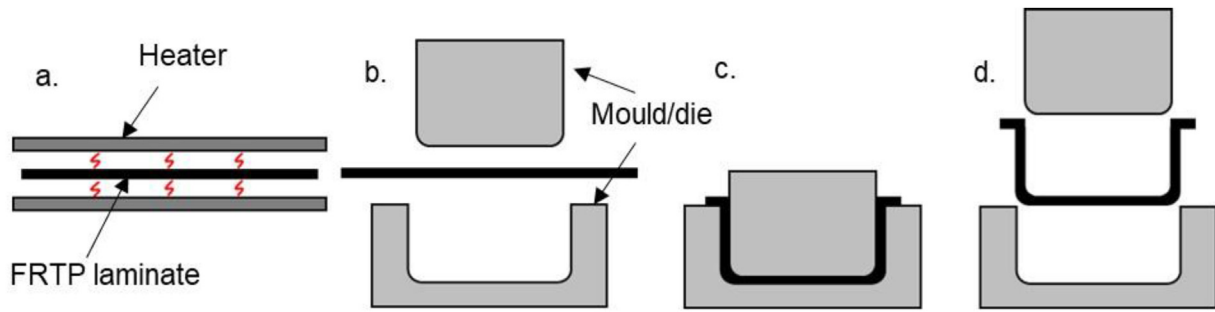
Typical stamp forming process for FRTPs, showing stages: (a) heating, (b) transfer, (c) forming, (d) removal.
